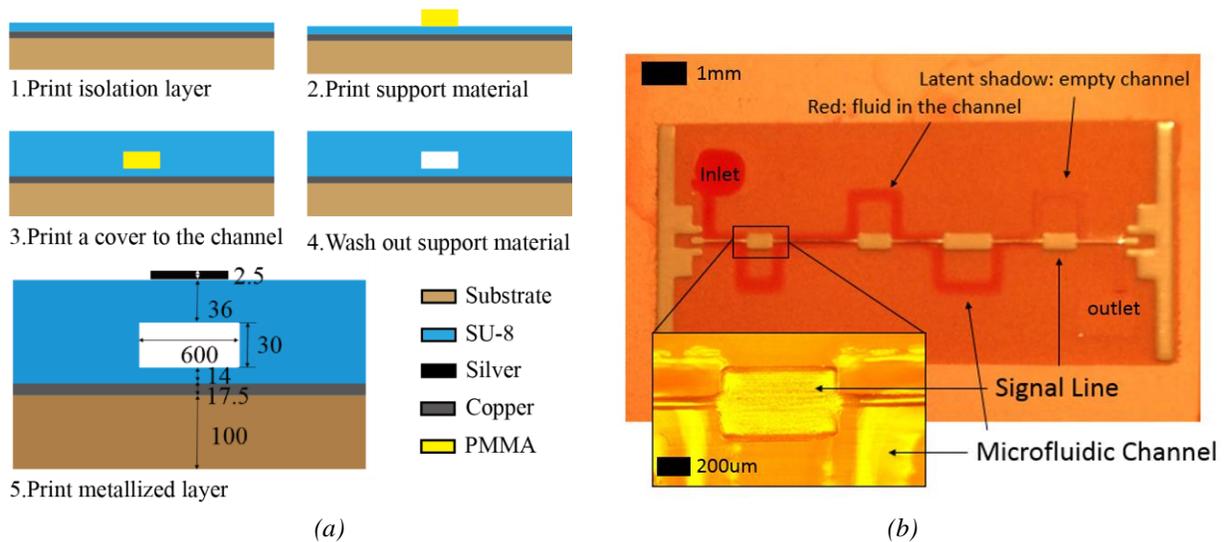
(a) Cross-section view of fabrication process (Unit: μm). (b) Top view of fabricated prototype.
